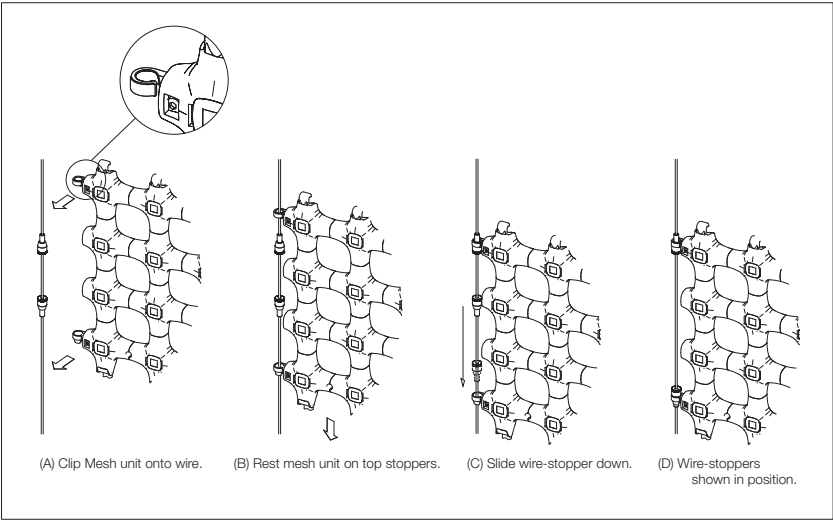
Attaching the Mesh unit onto the Mounting Wire
